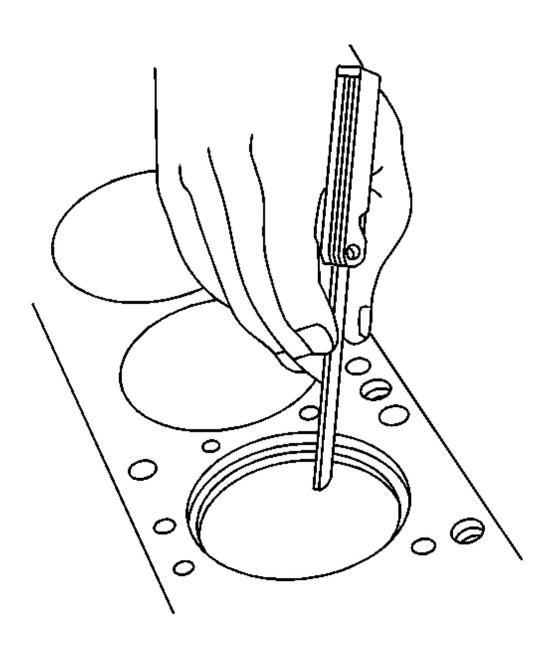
Measuring Piston Ring End Gap Courtesy of GENERAL MOTORS CORP.
